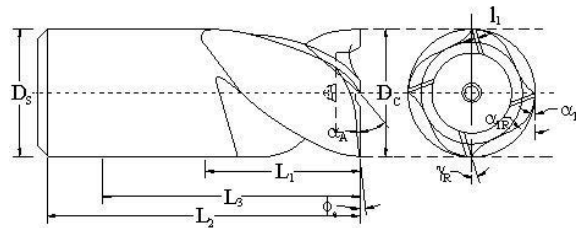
Two-Dimensional Projected Geometry of End Mill
